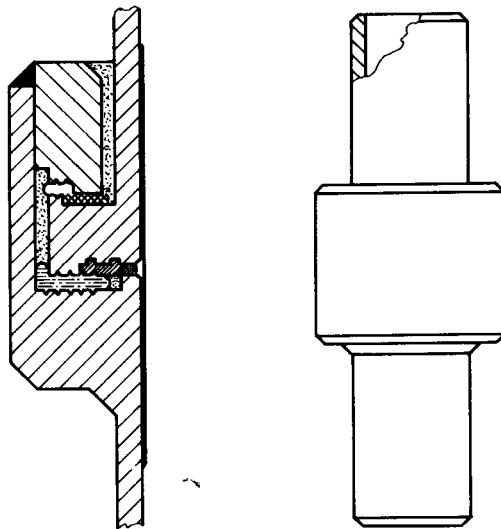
TYPICAL INSULATING FLANGE ASSEMBLY
